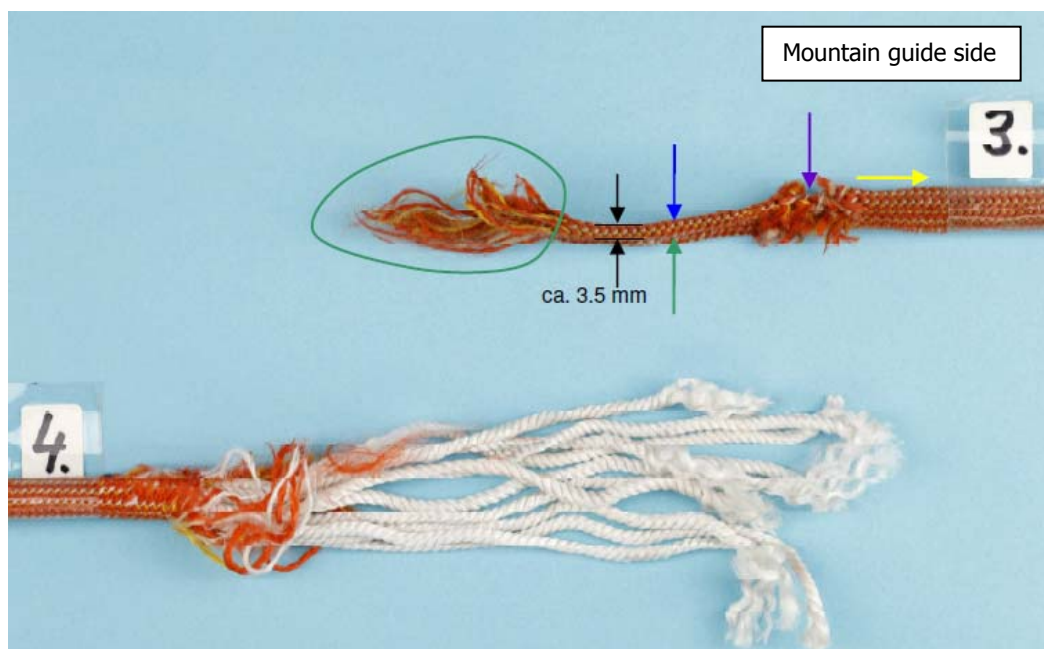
Side view of the deformed severance location (mountain guide side) and opposite end
